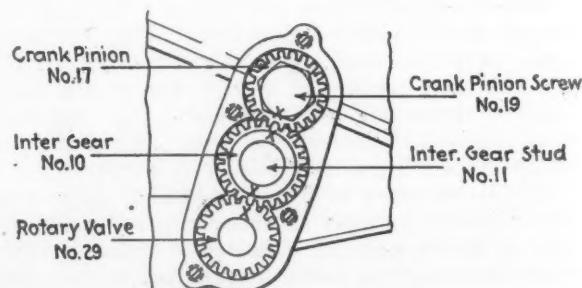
How the gears are lined up on a lever-driven close-quarter drill
